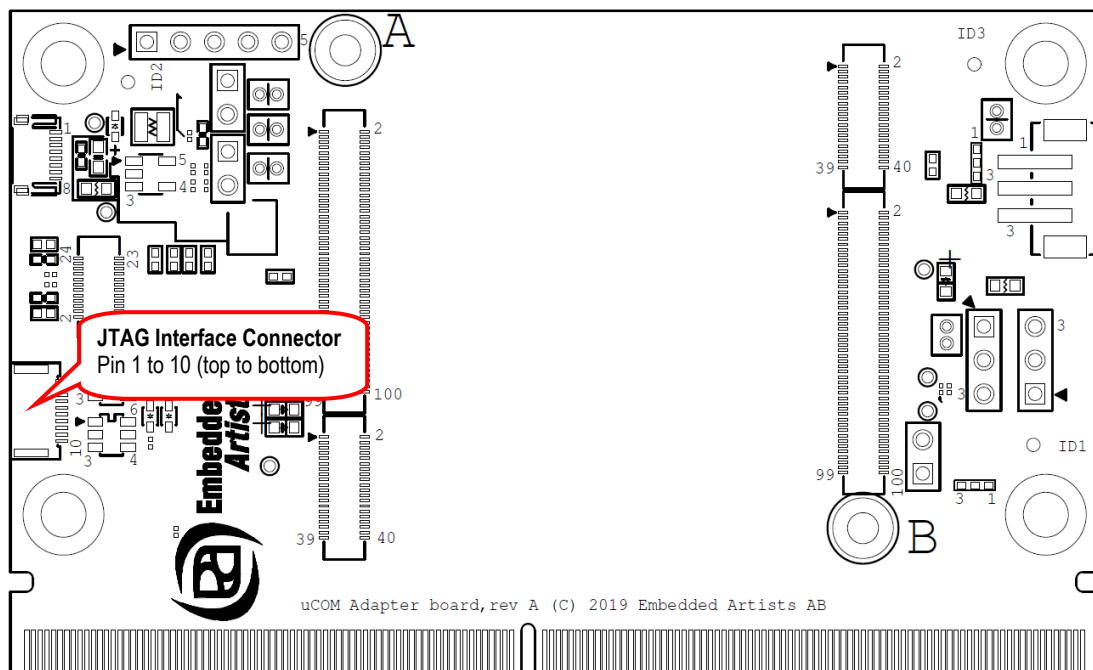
uCOM Adapter Board, Location of JTAG Interface Connector
